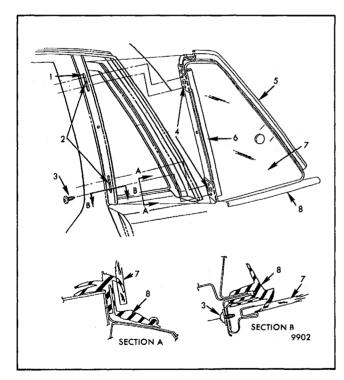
Quarter Swing-out Window Glass Assembly Installation - A-19 Style Shown; A-09 Style Similar
